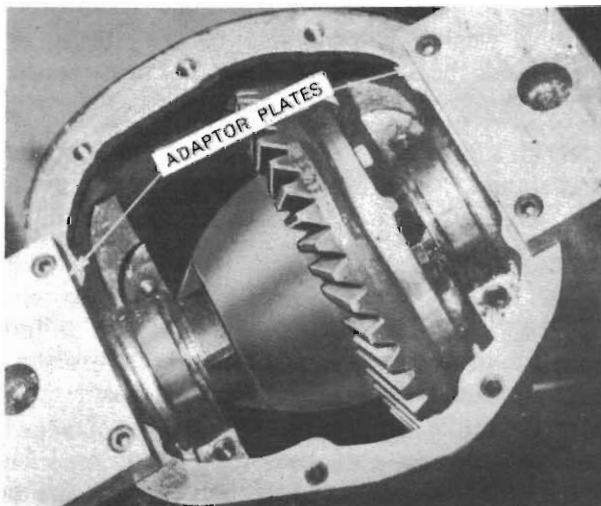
Spreading rear axle housing using Tools E3C15A and E3C15B
